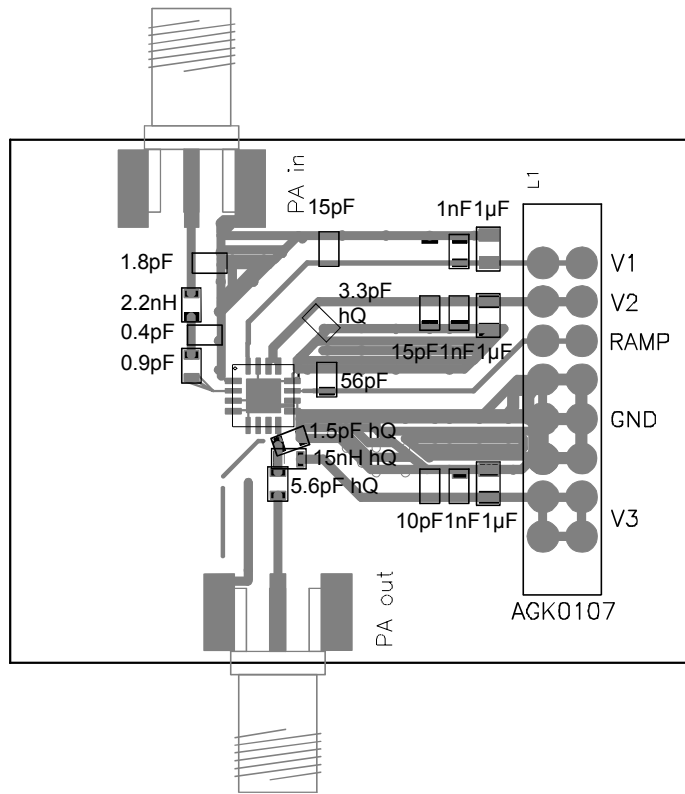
Layout of the T7023 application board for the HP-VFQFP-N16 package
